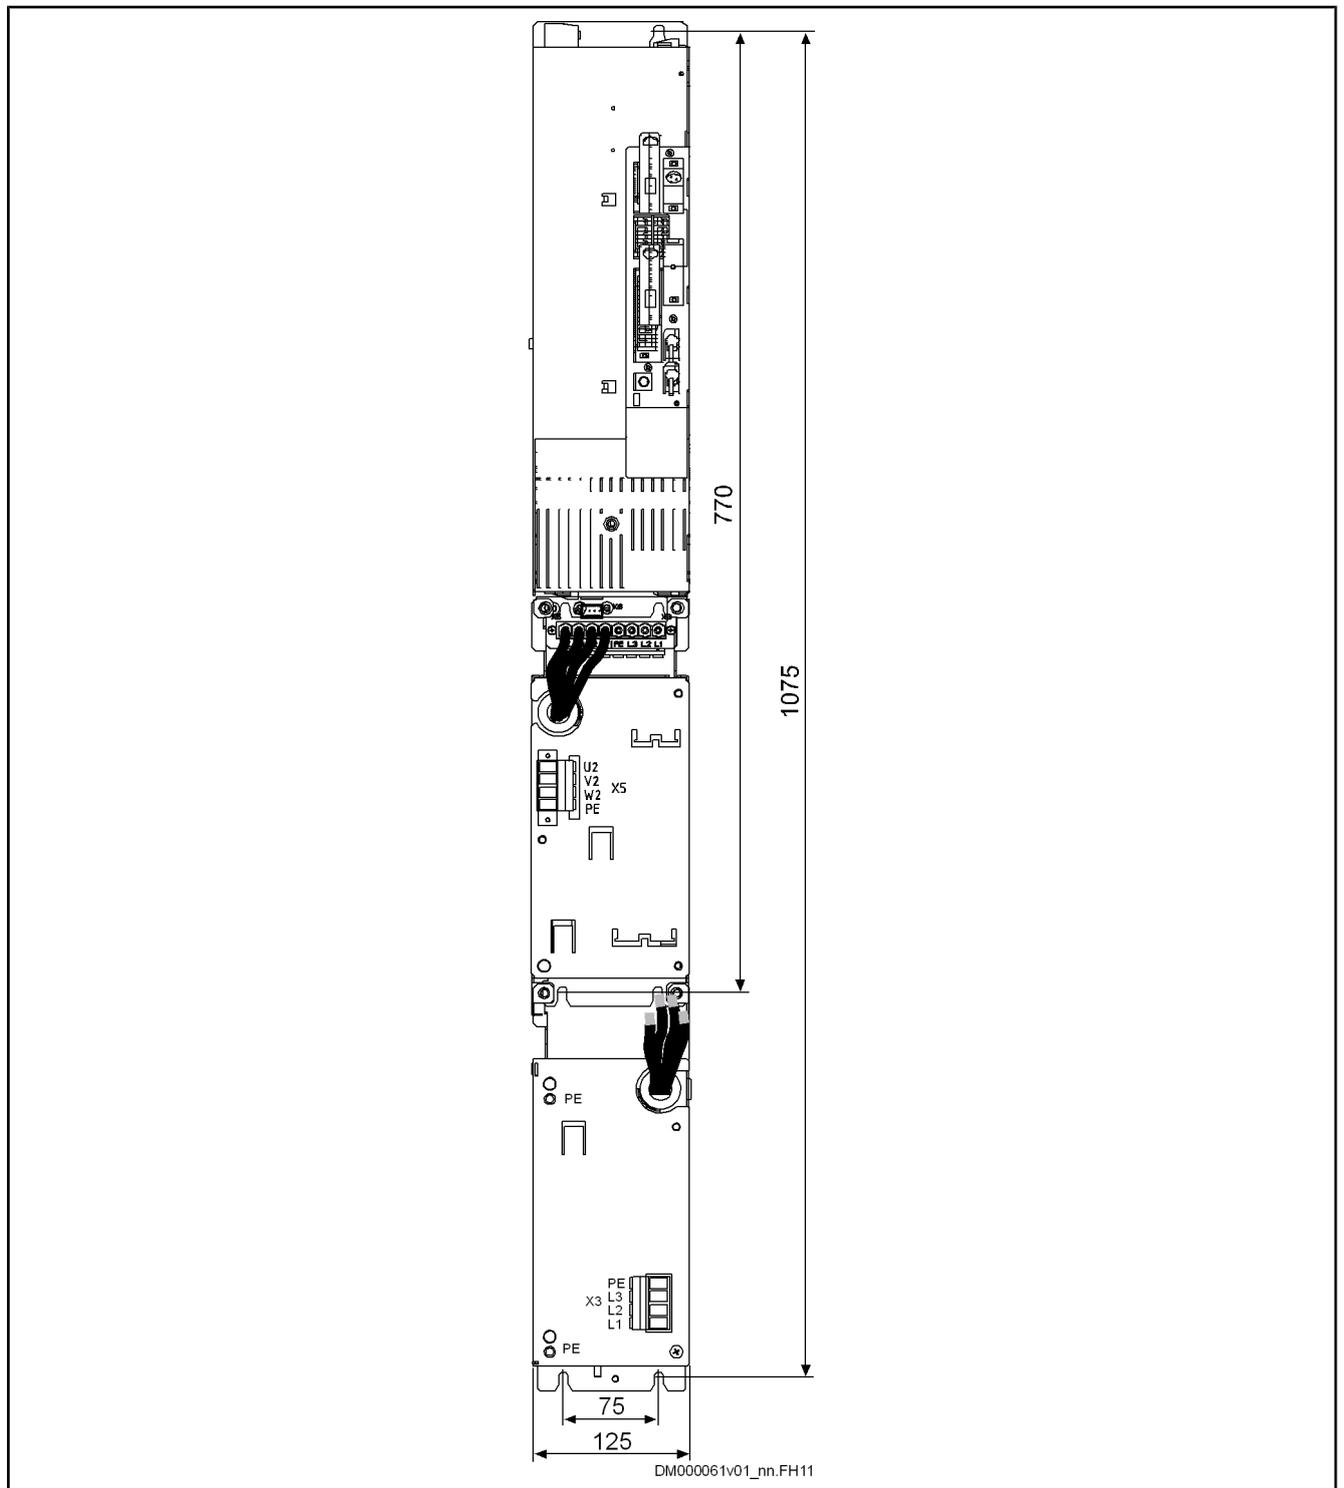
Arrangement HCS03.1E-W0070 / motor filter and mains filter + HAS05.1-001 + HAS05.1-002
